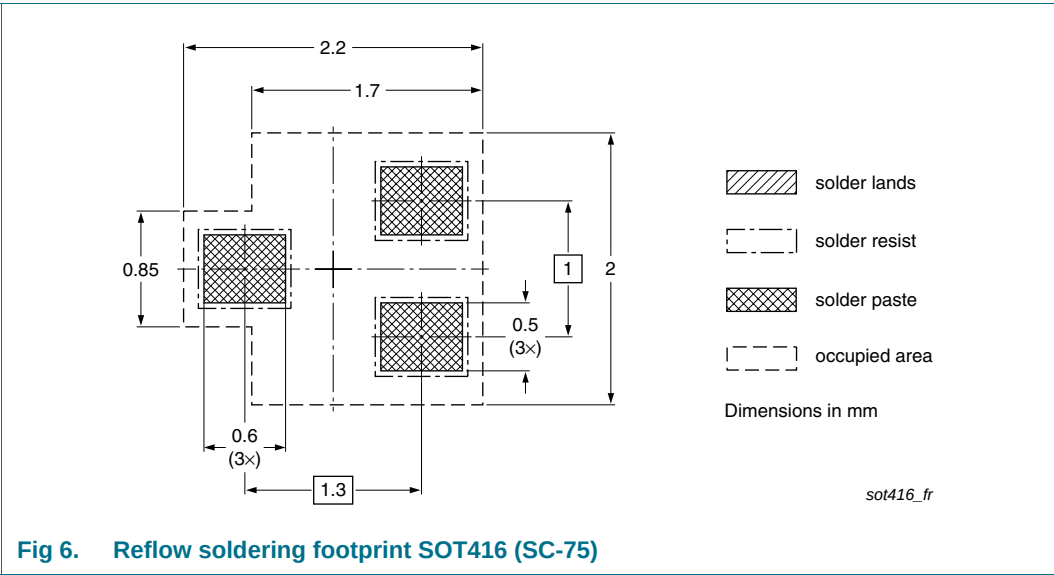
Reflow soldering footprint SOT416 (SC-75)
